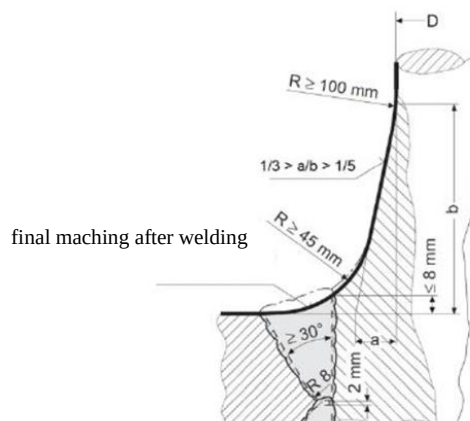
Welded joint between rudder stock and coupling flange
